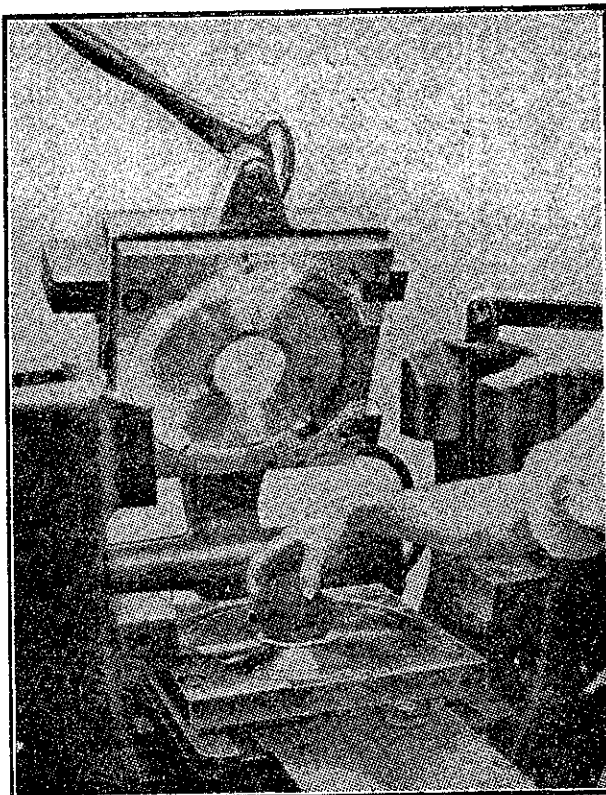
Hydraulic record press, showing top and bottom shells screwed to the dies, and a lump of plastic material being placed on the lower label prior to closing the press.
